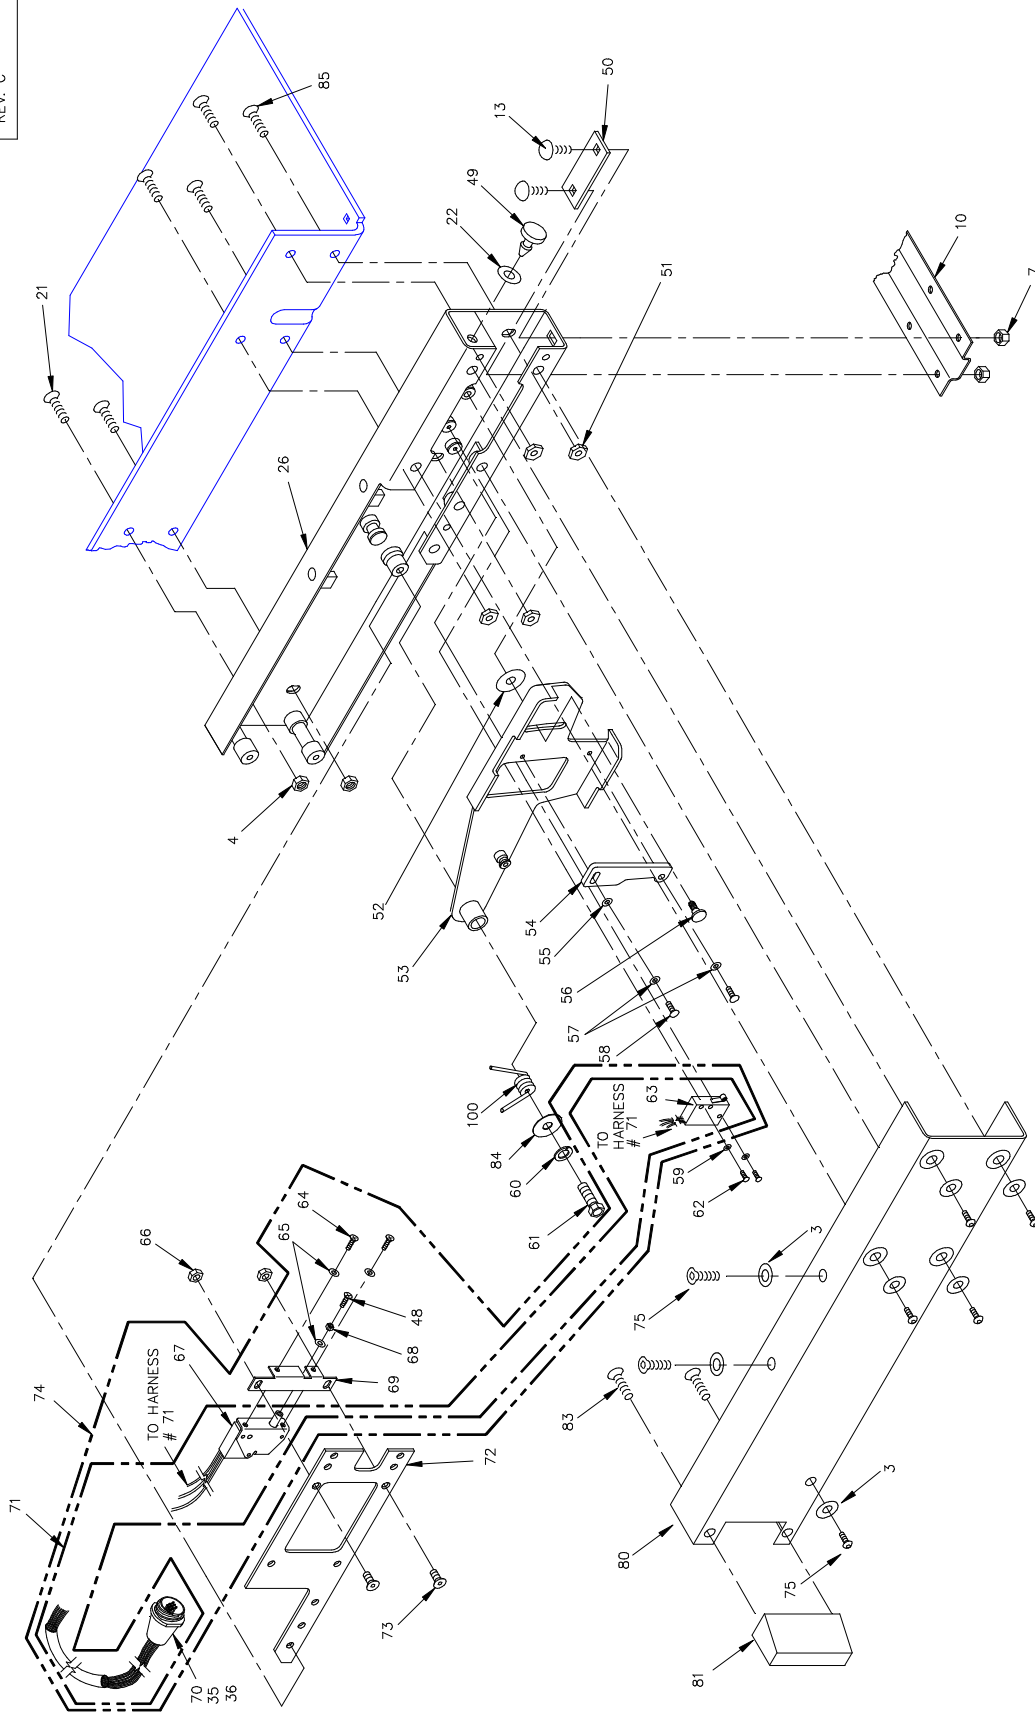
PLATFORM ASSEMBLY, LEFT SIDE DETAIL
